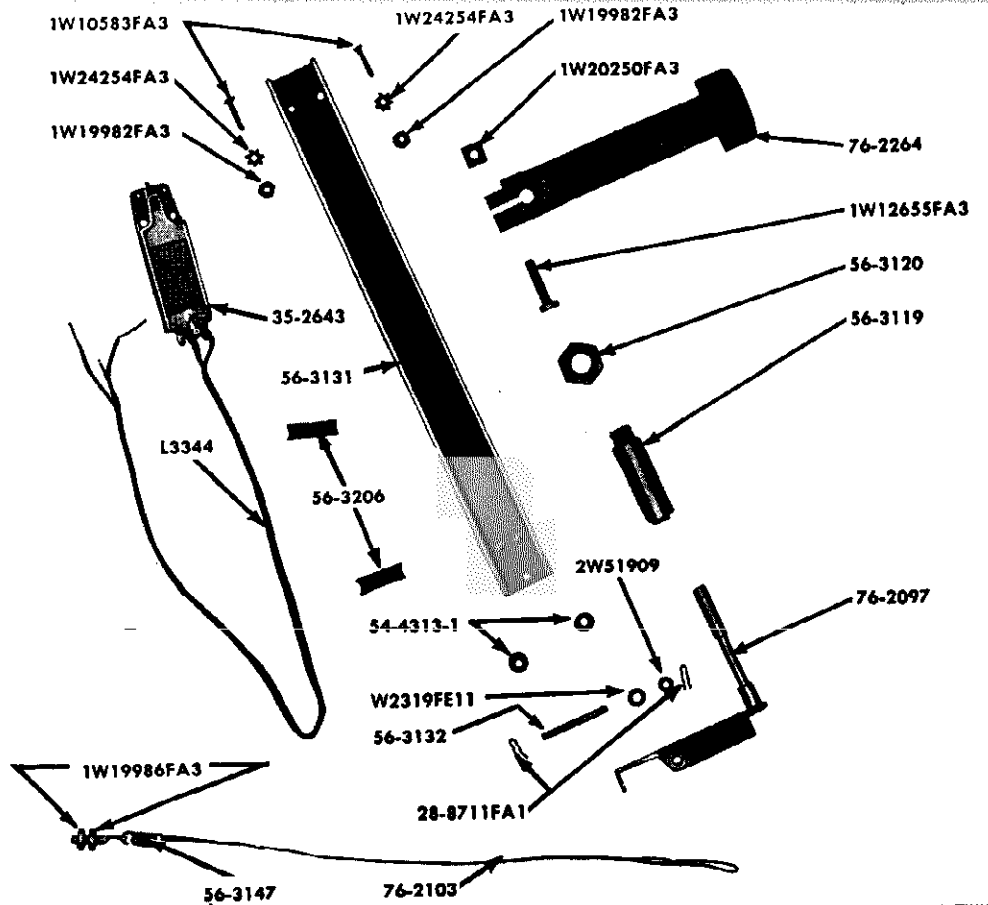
TOP VIEW OF MOTOR-BOARD AND PARTS.
